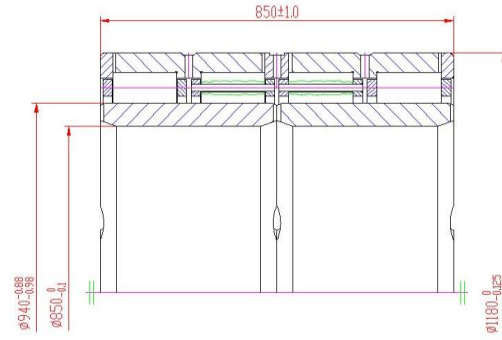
Assembly drawing of the four-row cylindrical roller bearing 4CRB 334633 F2CIIHB4ZBA
